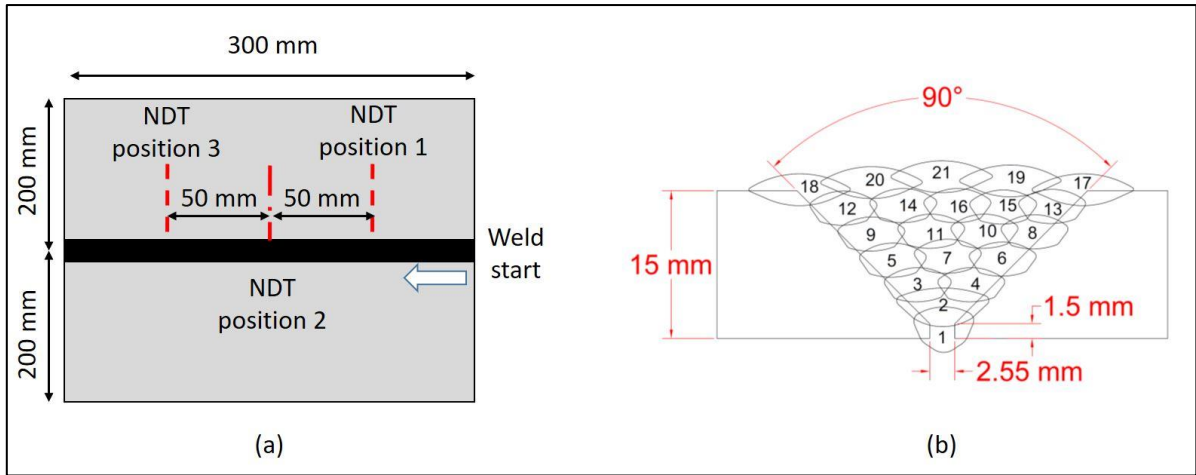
Sample geometry (a) and weld layout (b)
